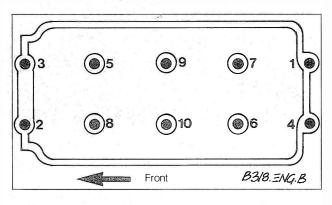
Cylinder head b. ¹oosening sequence for 4-cylinder engine.
